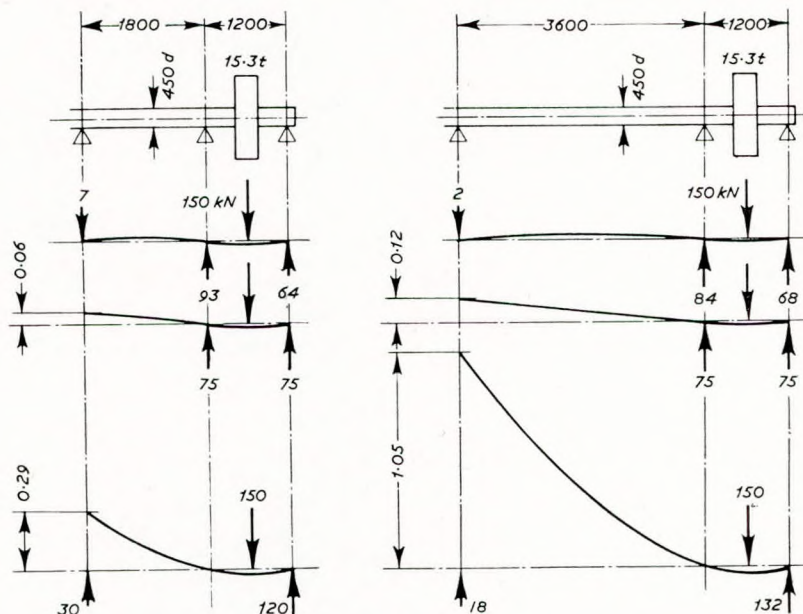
Reactions between main wheel and intermediate propeller shaft
